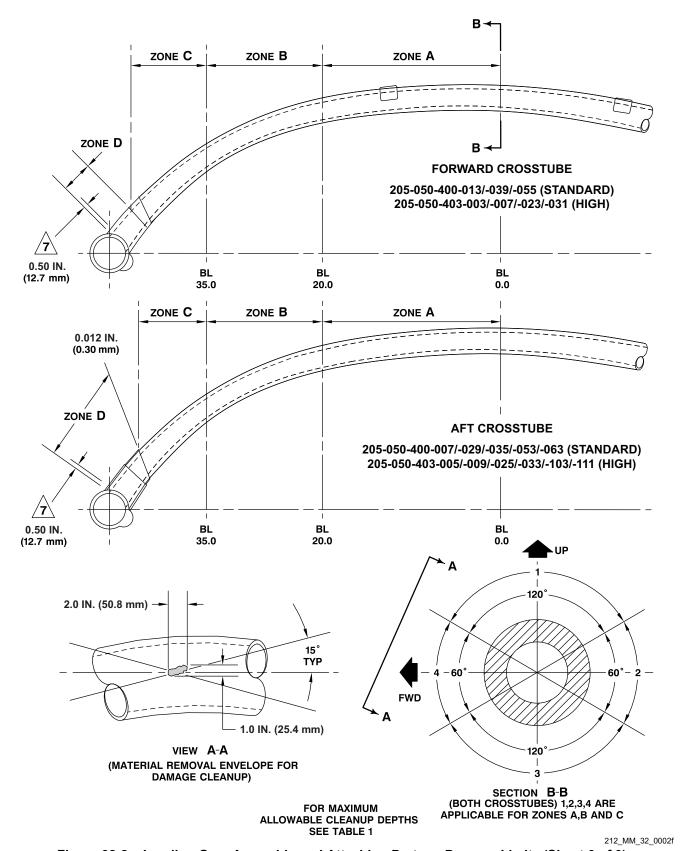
Landing Gear Assembly and Attaching Parts — Damage Limits (Sheet 6 of 9)
